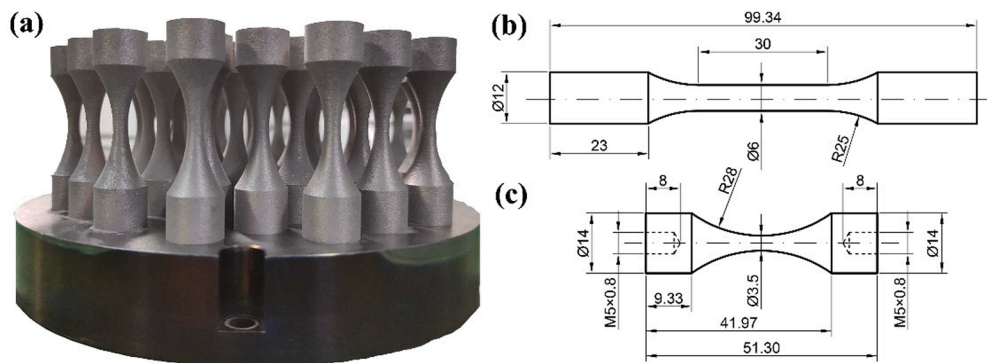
Manufactured specimens used for fatigue tests (a), shape and dimensions (mm) of specimens for tensile tests (b), and for ultrasonic fatigue tests (c).
